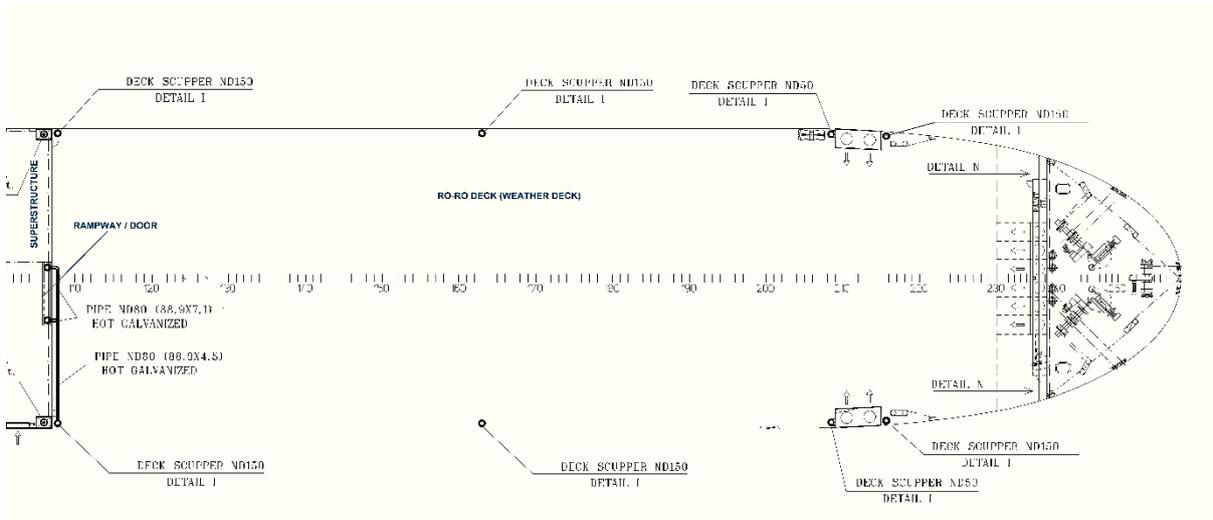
Typical ro-ro weather deck drainage arrangement with the position of the deck scuppers.
